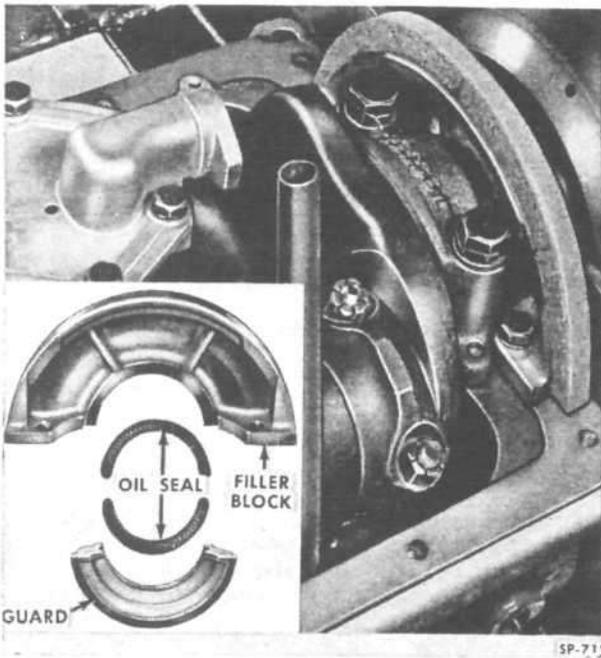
CRANKSHAFT REAR OIL SEAL AND FILLER BLOCK
